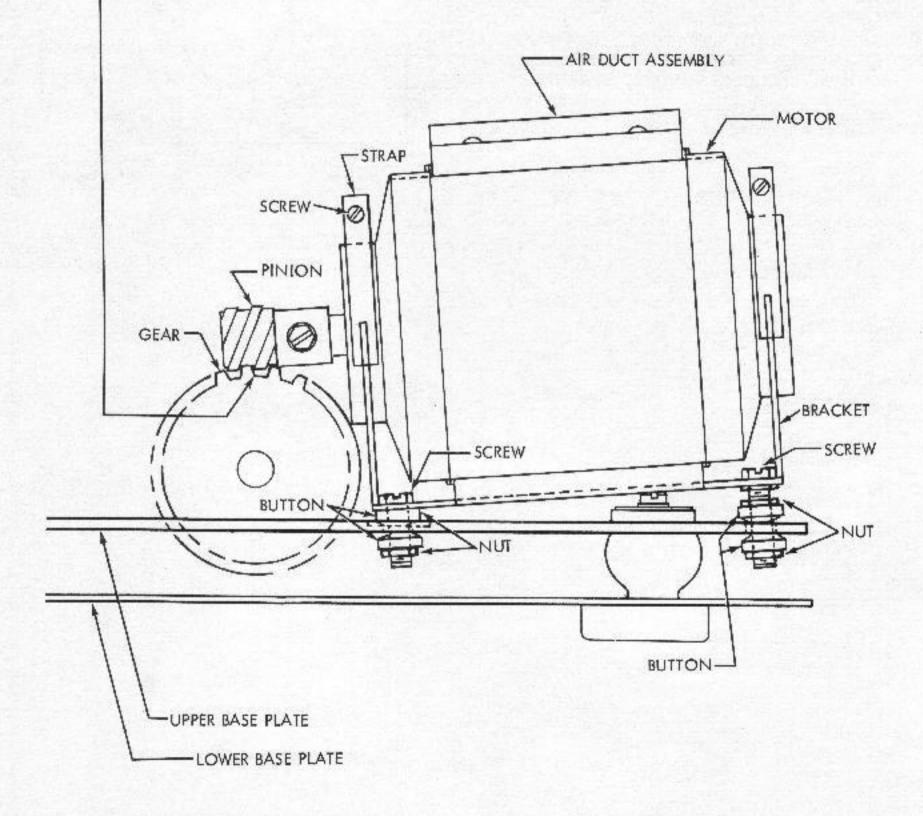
MOTOR UNIT FOR RECEIVE ONLY COMPACT TAPE PRINTER SET
